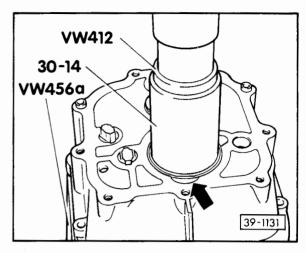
Pressing deep-groove ball bearing fully home into bearing carrier
